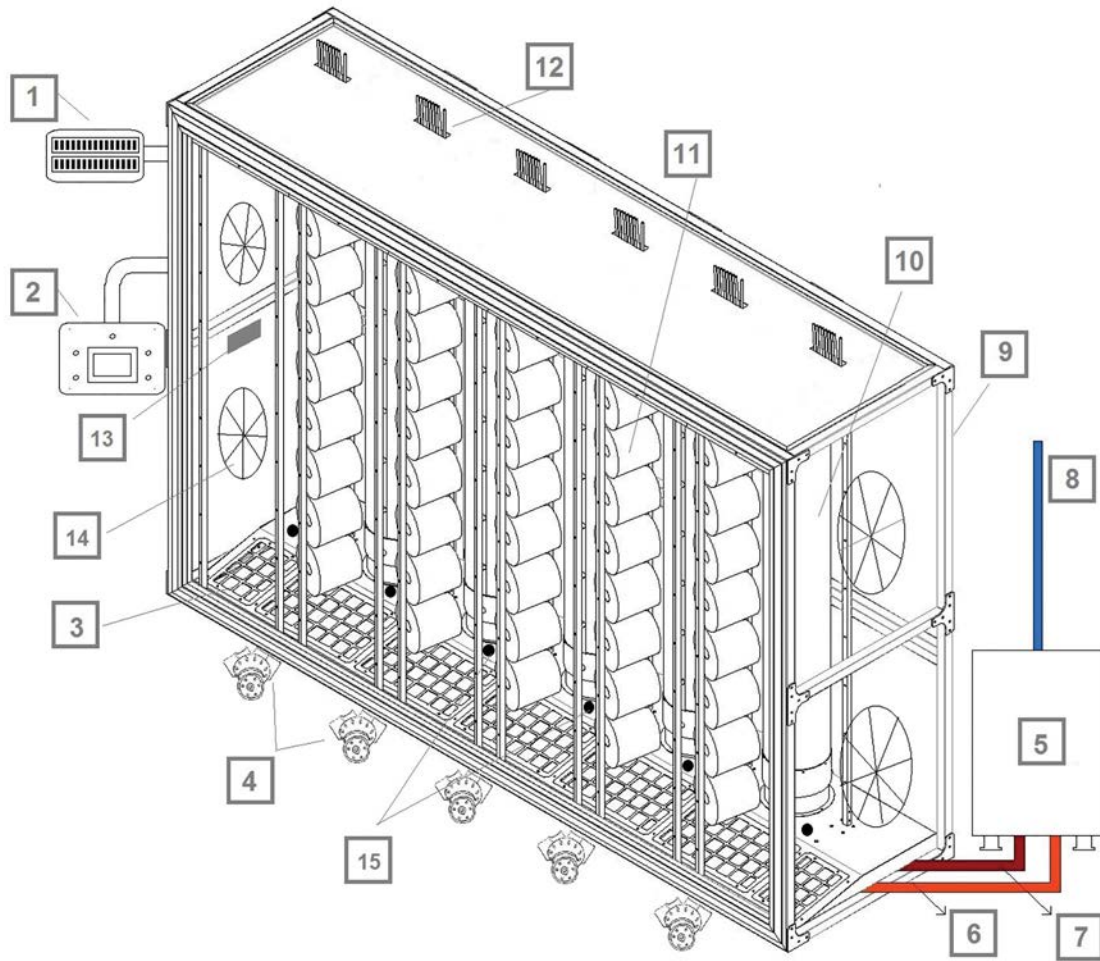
Technical drawing of the creel conditioning cabinet that was developed
